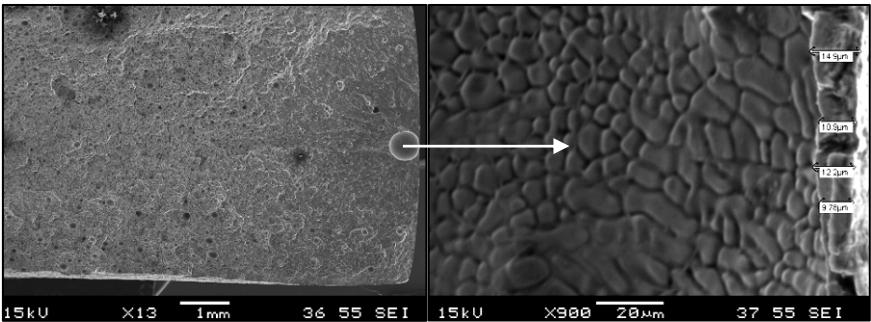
Fracture surface appearance in fatigue zone of MLH welded samples.
